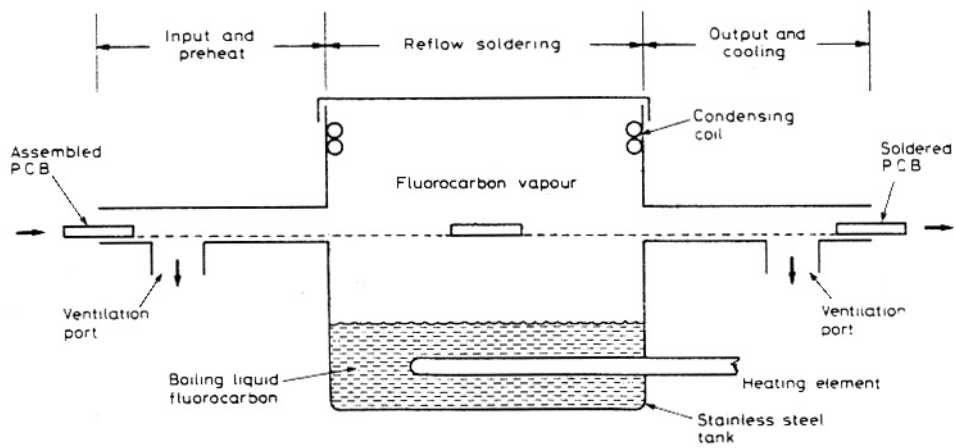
a): Principle of in-line vapour phase soldering machine.
